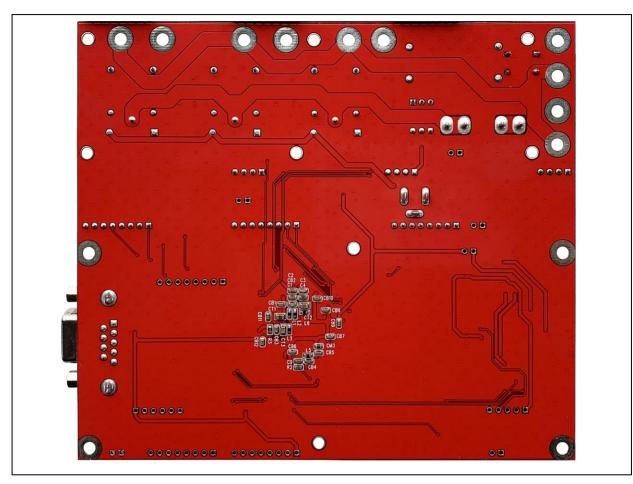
Rear View of Main Board on M487 Smart Power Board
